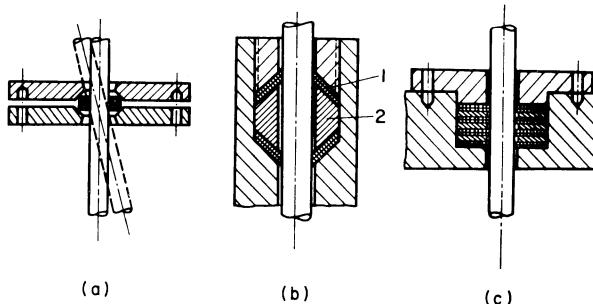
Shaft seals: (a) with square cross section gasket (after Cowie²⁴¹); (b) with conical gaskets (after Ridenour¹⁰⁵⁷); (c) with flat gaskets (after Billett¹²⁴). (*Courtesy of The American Institute of Physics and of The Institute of Physics, London*)
